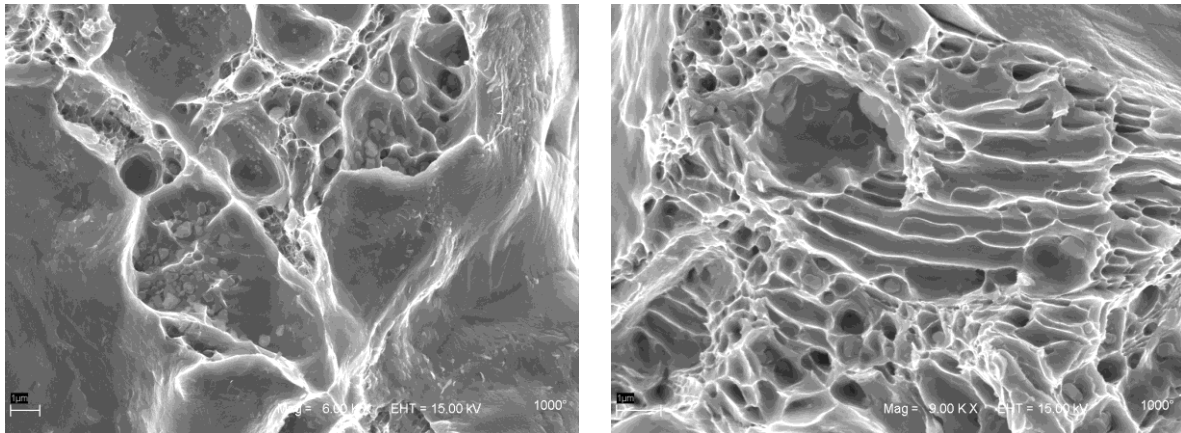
MAIN FAILURE MECHANISM FOR DUCTILE FRACTURE IN A1000-3.
